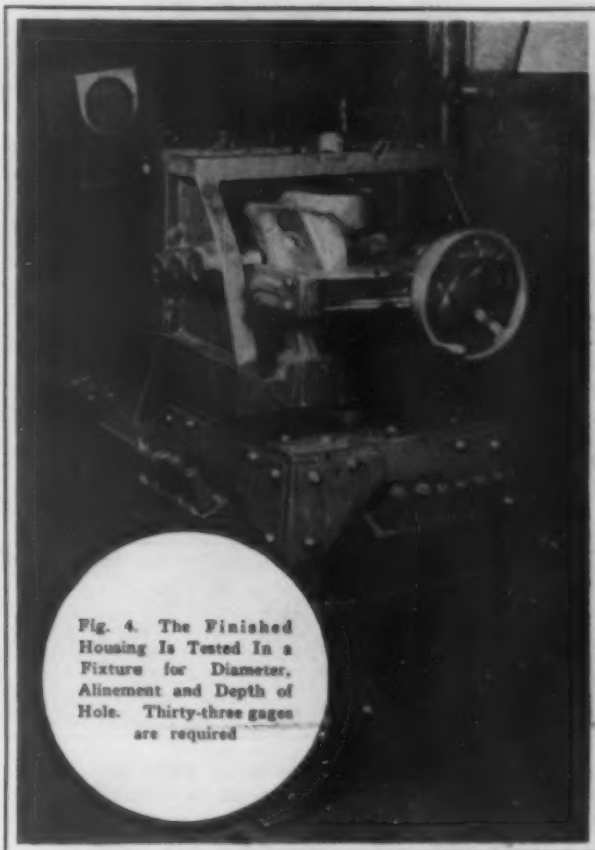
The Finished Housing Is Tested In a Fixture for Diameter, Alinement and Depth of Hole. Thirty-three gages are required
